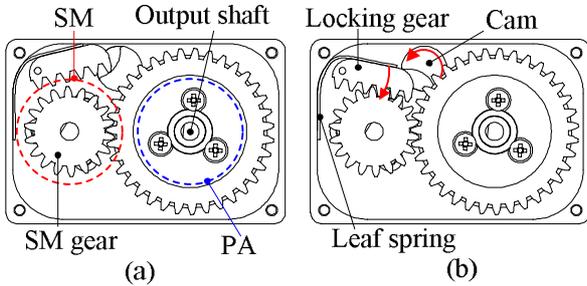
Clutch mechanism for high torque mode; (a) before clutching, and (b) after clutching.
